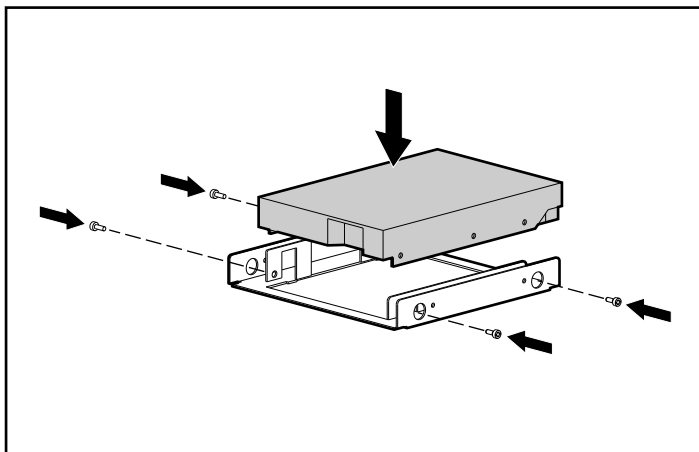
Attaching a 3.5-inch drive to a 5.25-inch bracket
